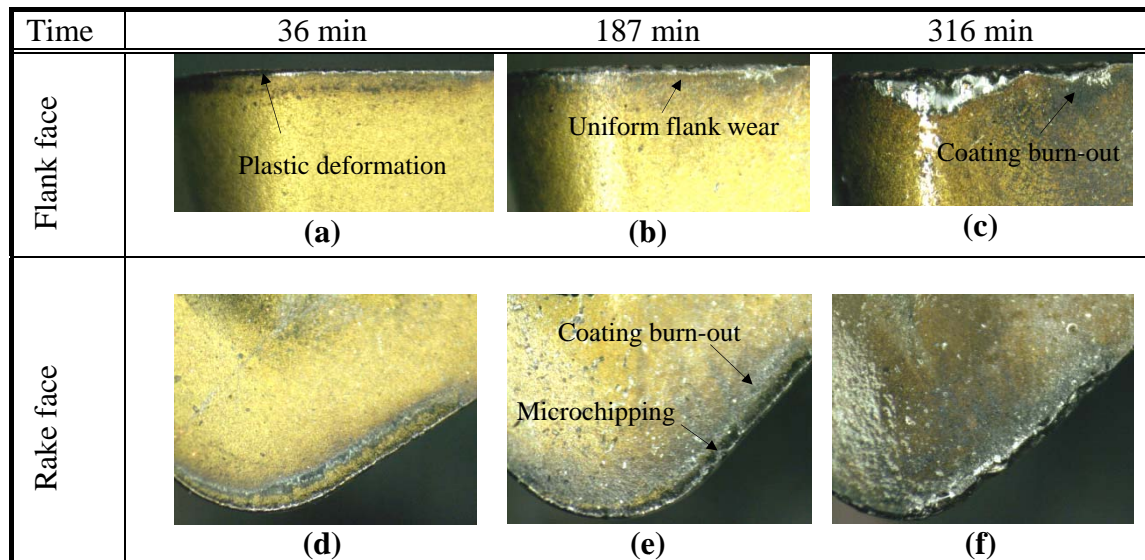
Tool wear evolution during dry machining of P20-AIR MELT steel at cutting speed of 100 mm/min.
